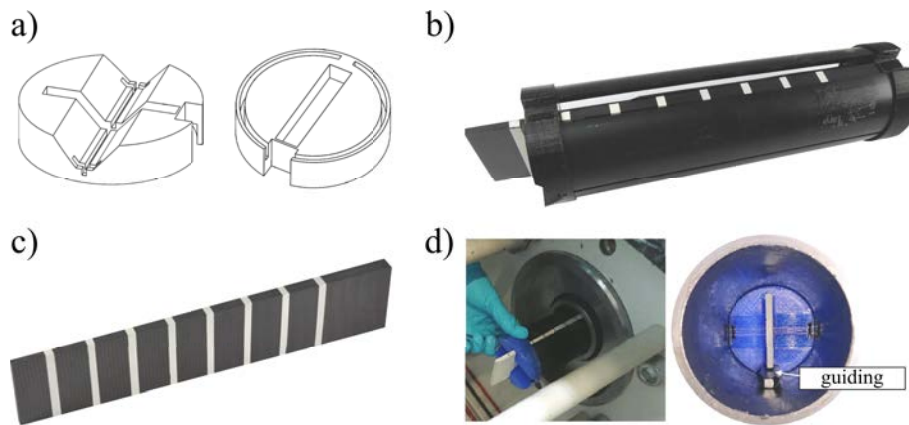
Projectile setup with a) 3D printed endcaps; b) Projectile assembly; c) Laminated CFRP impactor and d) Projectile assembly in gas gun barrel
